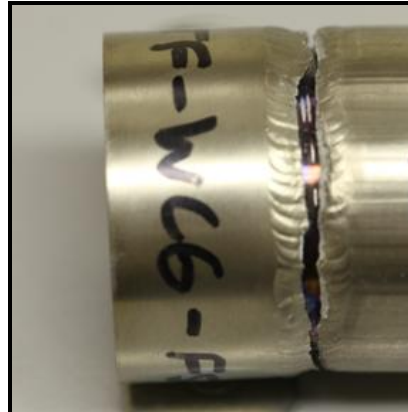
TF-WC4-FS seam weld fracture
